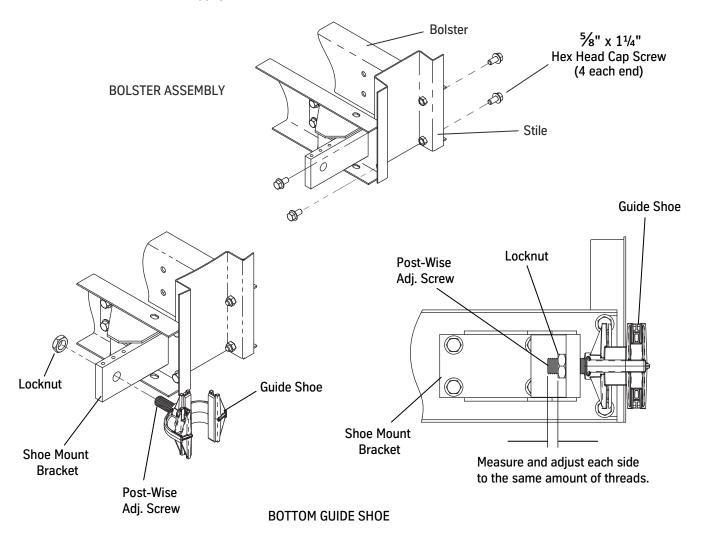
Install Bolster Assembly and Bottom Guide Shoe
